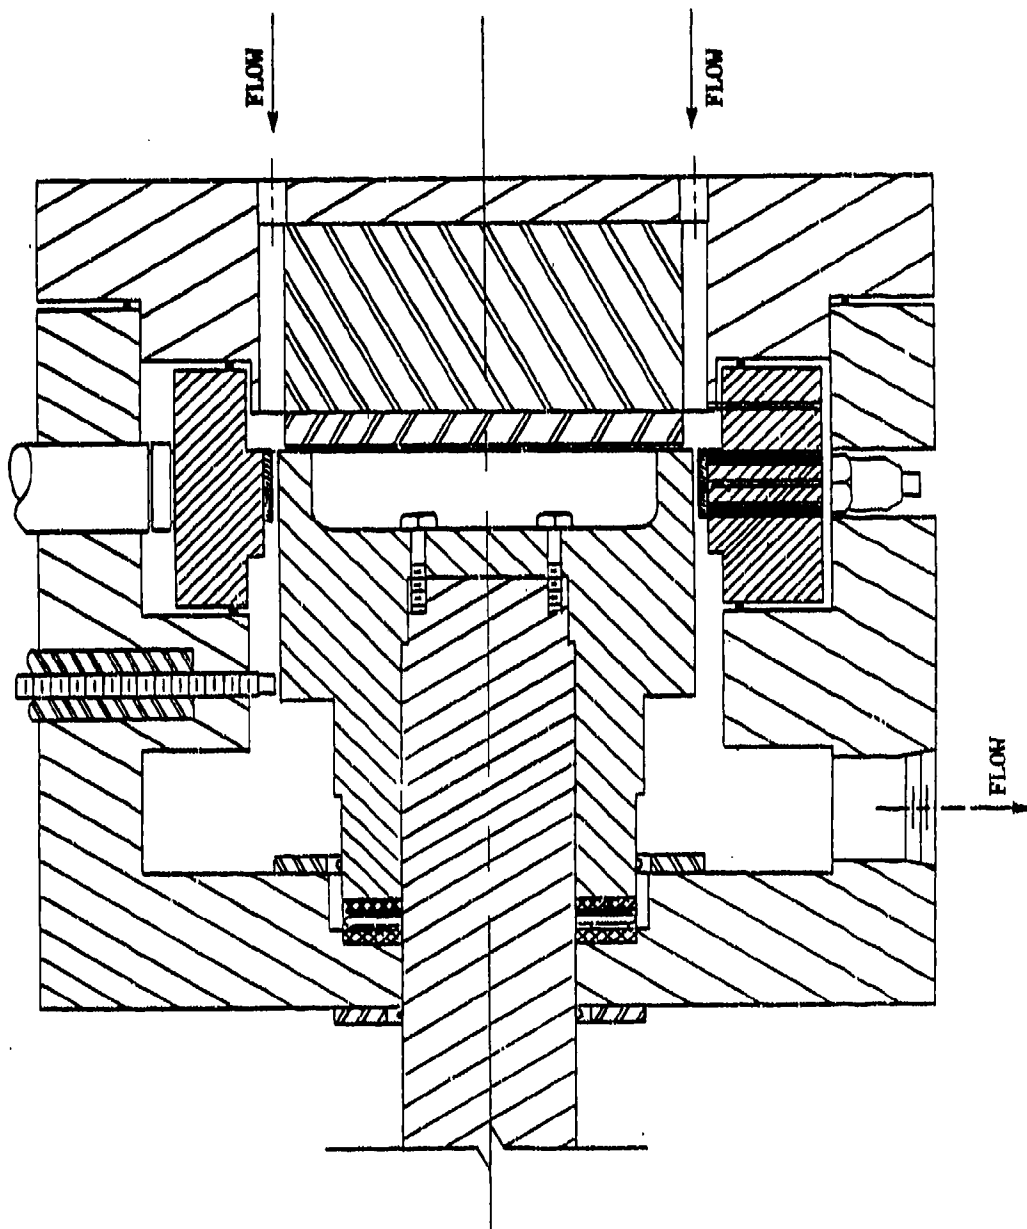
Cross-sectional view of test section showing honeycomb stator.
